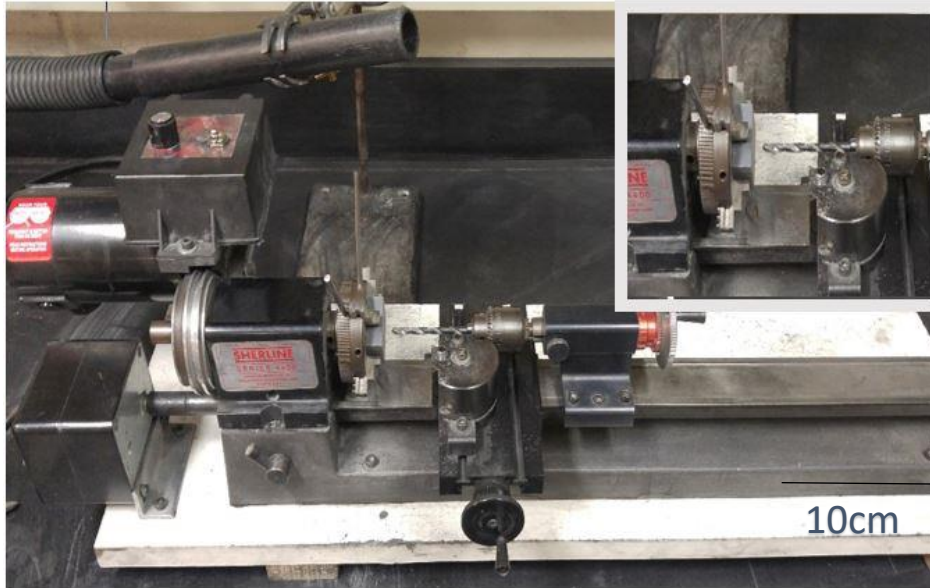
The Sherline series 4400 lathe shown was used to machine parts used to house the sample. Insert (top right): a middle section of the pyrophyllite cube is in a 4-jaw chuck with the drill set up.
